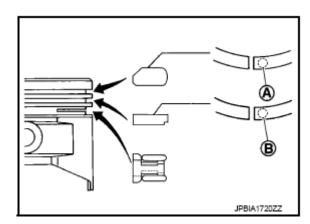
Locating Top Ring And Second Ring Stamped Mark Courtesy of NISSAN NORTH AMERICA, INC.
